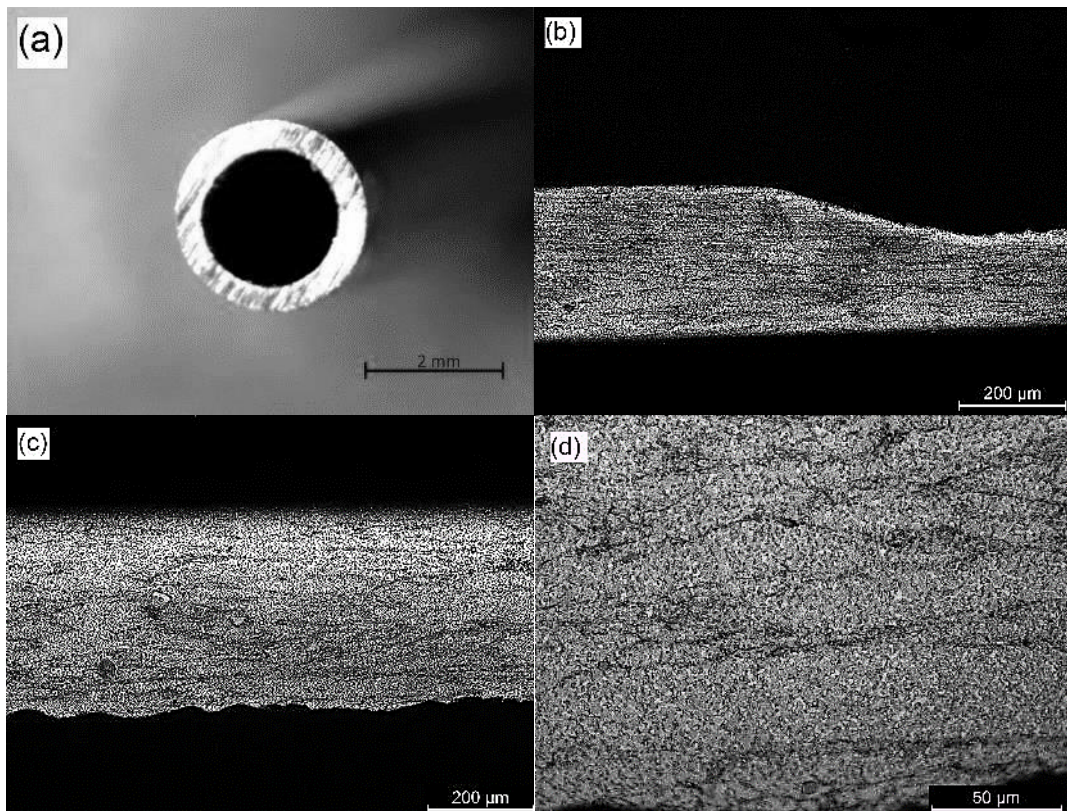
(a) General view of the machined tube, (b) interface between before and after machining, (c) general microstructure view and (d) microstructure of the machined tube.
